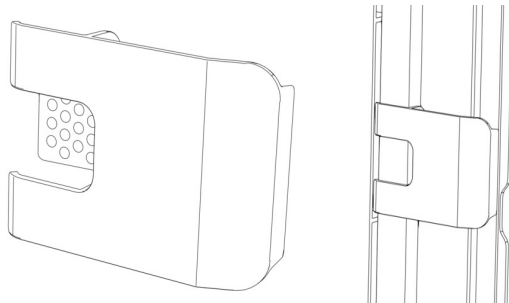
Tubing bracket (left), tubing bracket installed (right)
